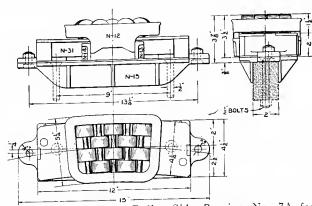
Creco Roller Side Bearing No. 7A for Six-Wheel Passenger Train Car Trucks.
